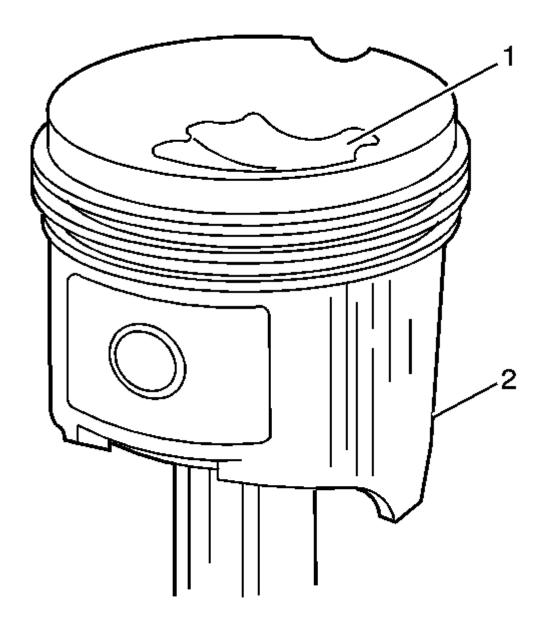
Inspecting Piston For Eroded Areas & Damaged Skirt Courtesy of GENERAL MOTORS CORP.
